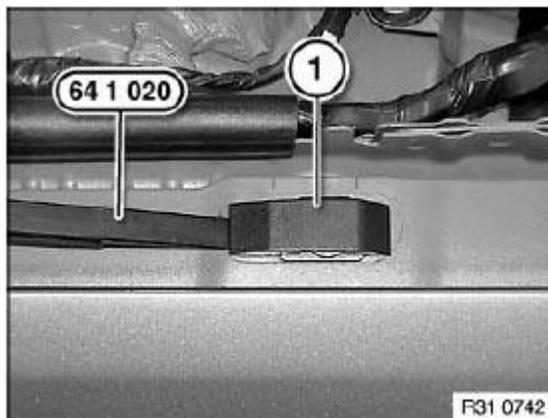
Removing Cover Cap Using Special Tool (64 1 020)
